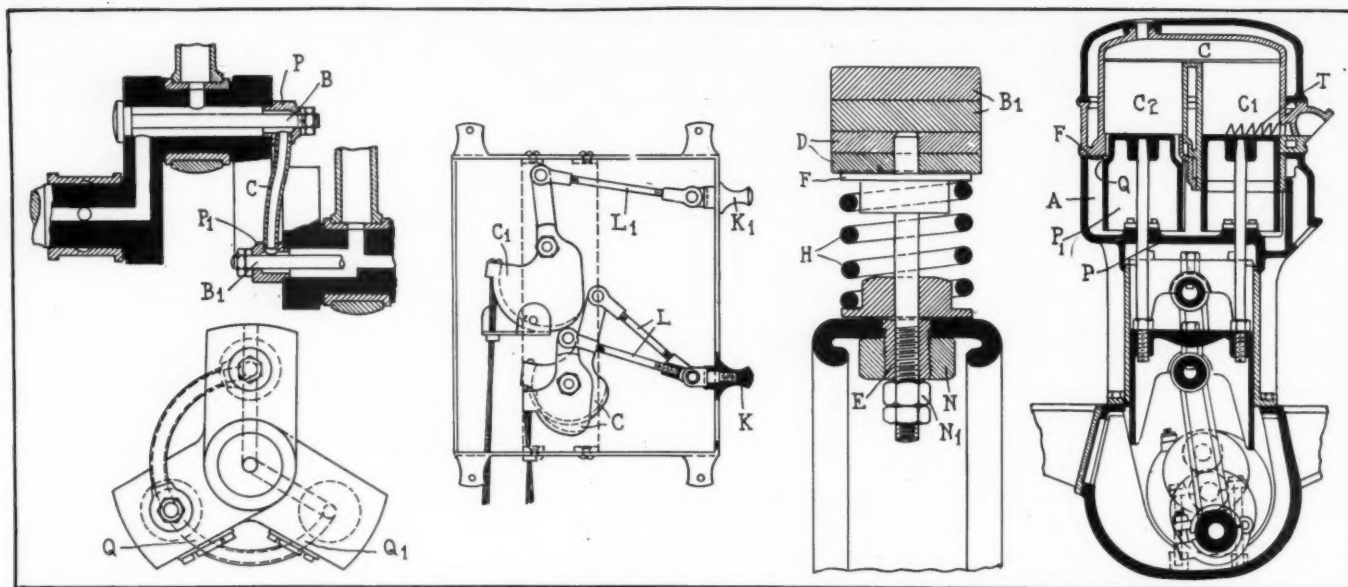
Delaunay-Belleville crankshaft lubrication. Fig. 15—Bowden control mechanism. Fig. 16—Sutcliffe coiled-spring automobile tire. Fig. 17—Giles twin-cylinder automobile engine
